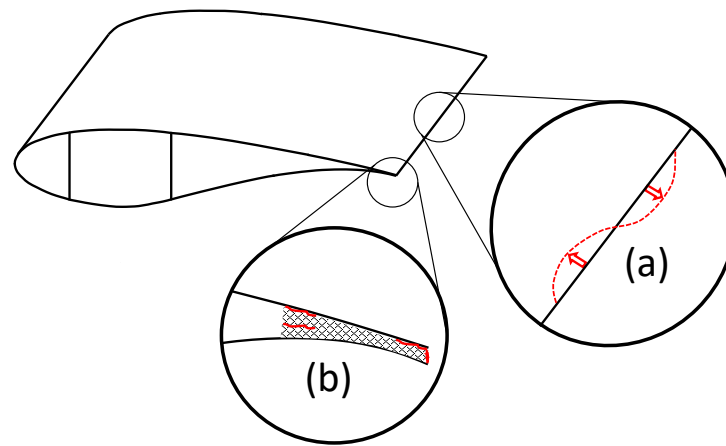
Trailing edge failures: (a) buckling and (b) debond and cracking.
